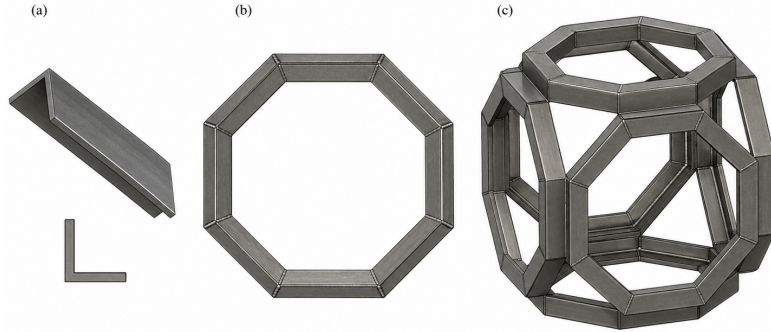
Steel-angle frame used for the redesigned chamber: (a) individual frame ligament with L-shaped cross section, (b) one assembled octagonal face, and (c) the complete welded chamber frame.
